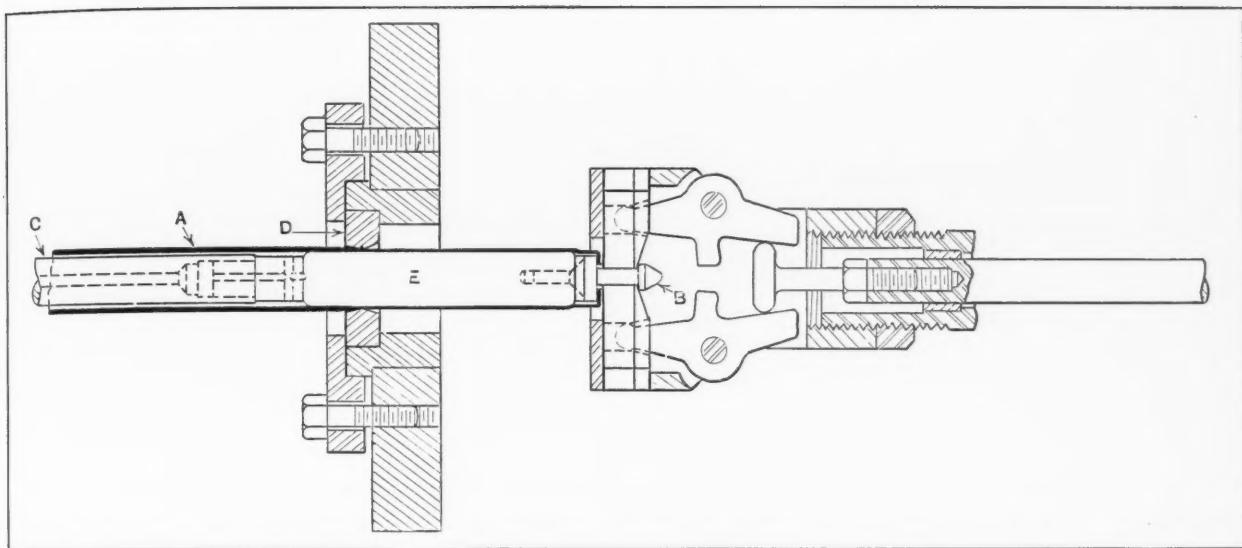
Position of the Tube, Pulling Head, and Pushing Plunger at the End of the First Stroke, the Tube having been Pulled through the Die 8 Inches
